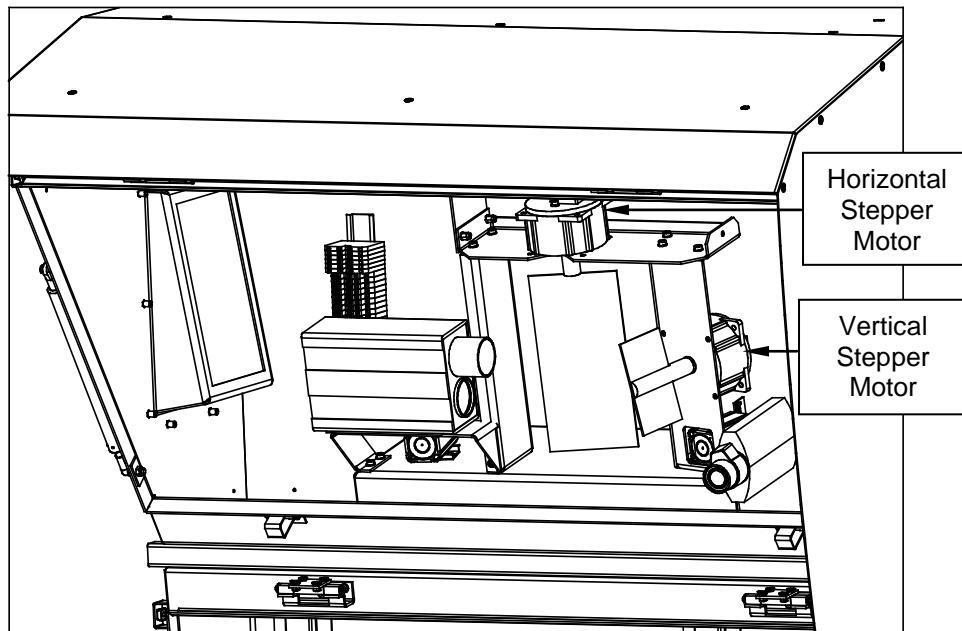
SAFEDOCK T1 STEPPER MOTORS OF LASER SCANNING UNIT
